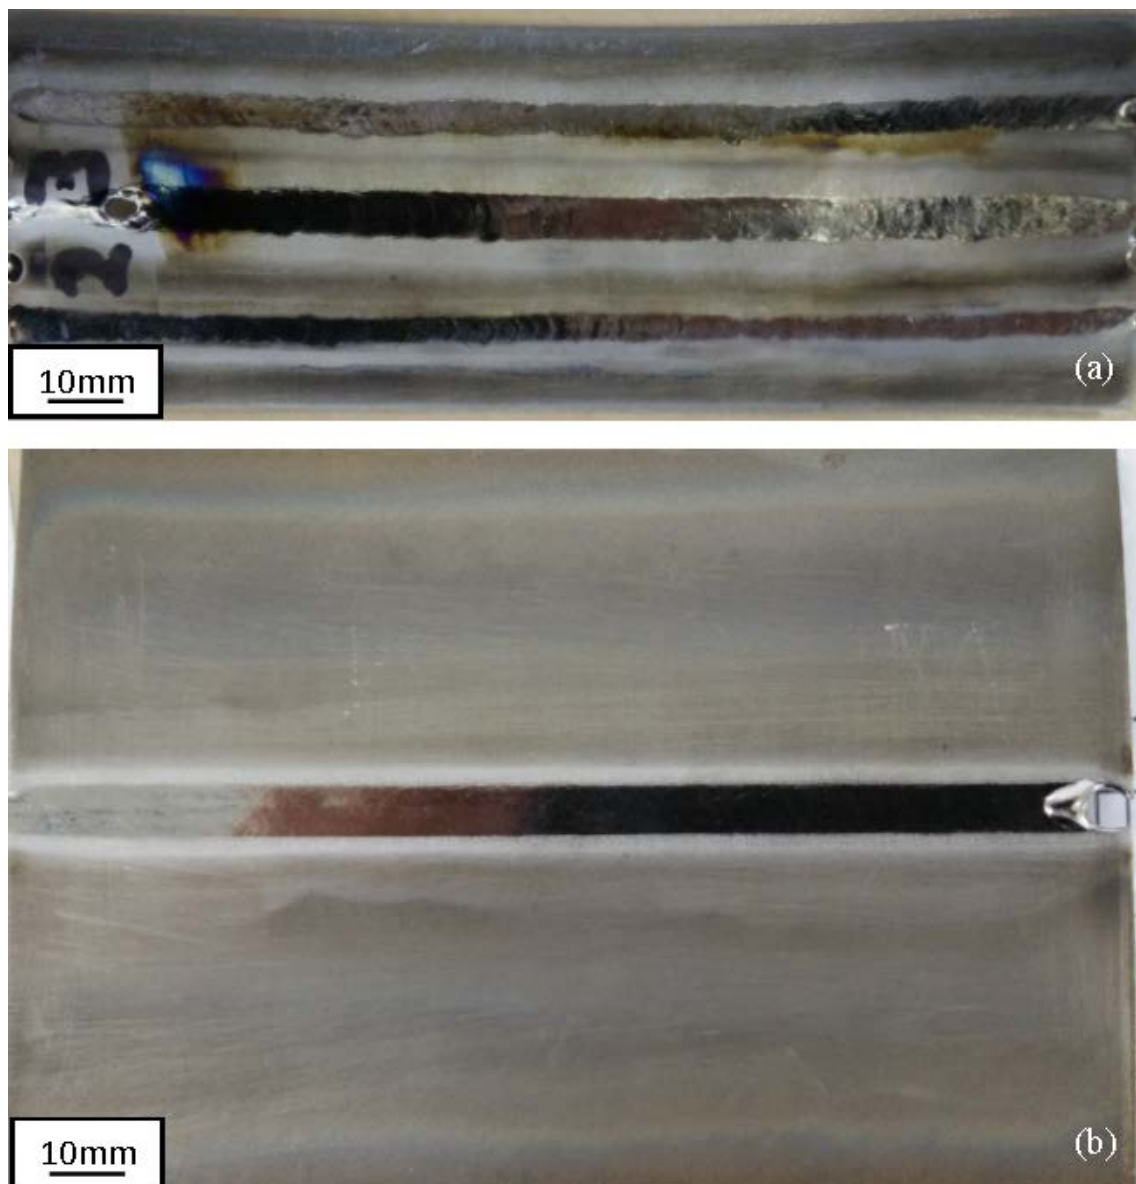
Top view of GTAW weldments: (a) bead on plate (BOP), (b) butt joint
